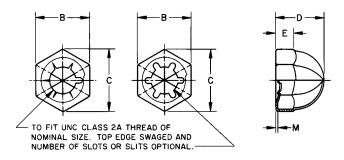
FORMED THREAD ACORN TYPE STAMPED NUTS
